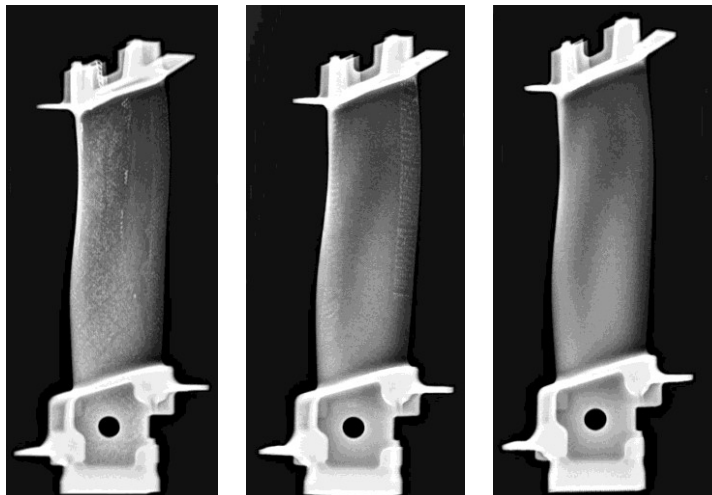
Flat-, 45°- and upright-built turbine blade, removed from the building plate, X-ray transmitted images
